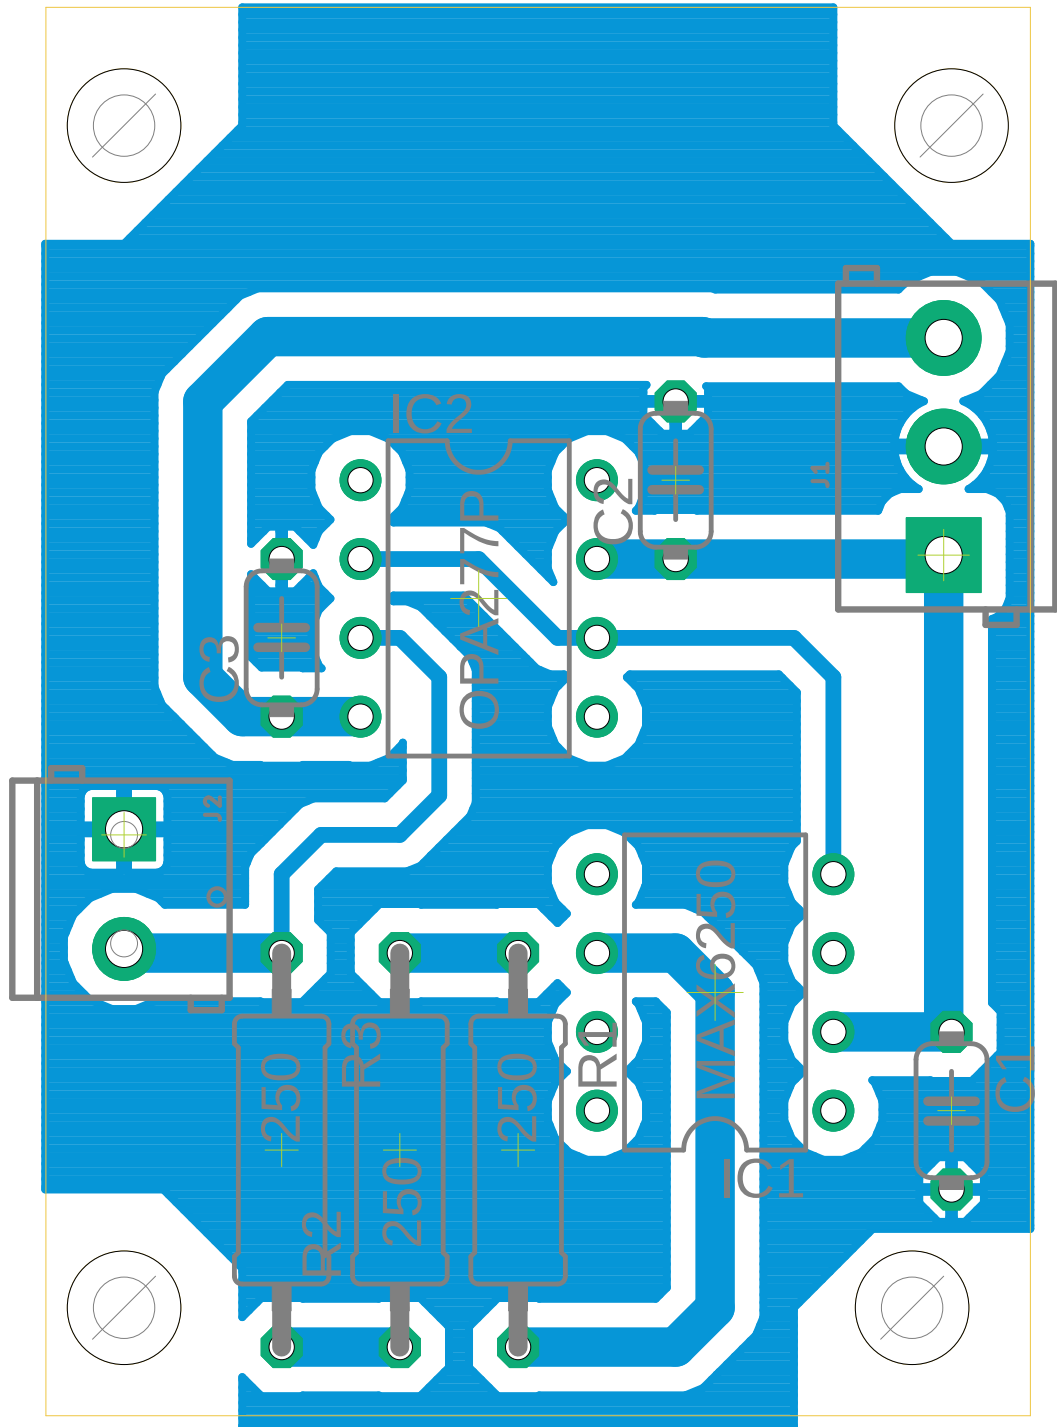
PVC1000 board implementation. Blue: bottom PCB layer.
